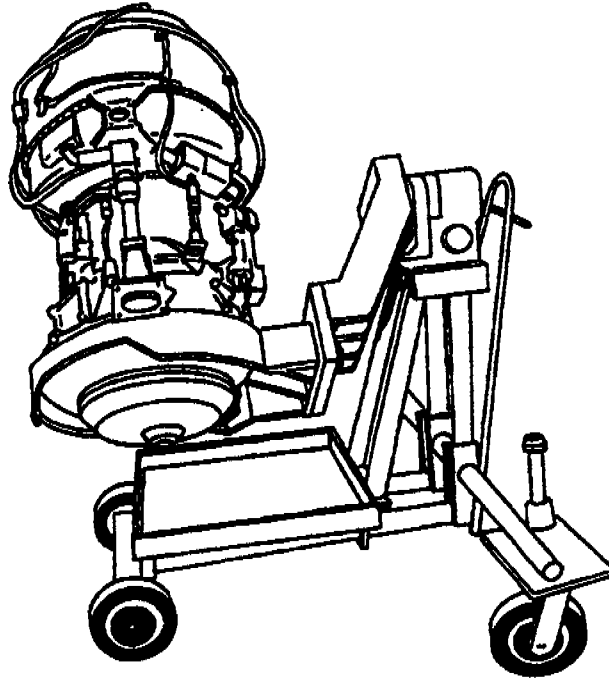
Installing Engine on Disassembly Stand (Typical).
